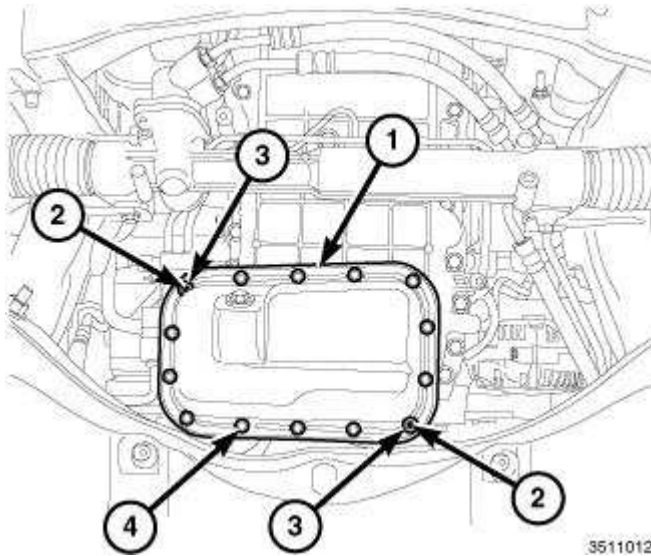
Bolts, Studs, Nuts & Lower Oil Pan
